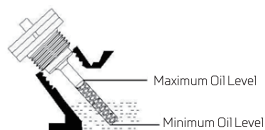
Oil Fill Opening, Dipstick and Oil Level
